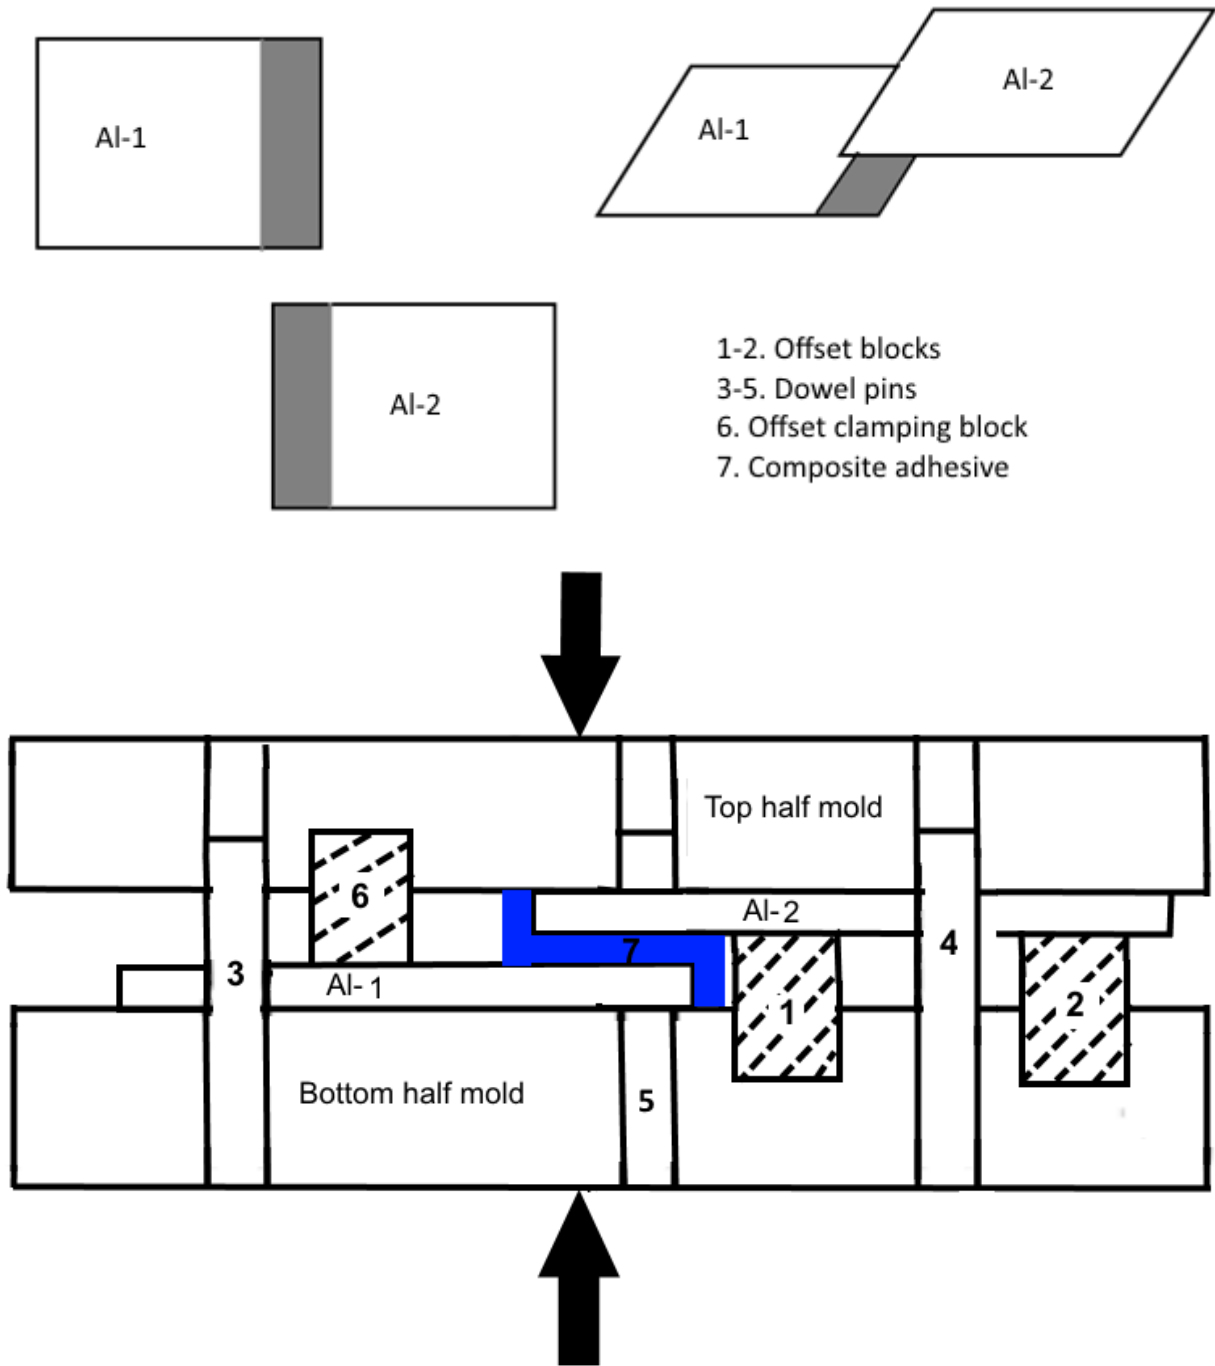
Bonding process of SLS test panel mold assembly to manufacture SLS test coupons with bond-line thickness over 0.15 mm
